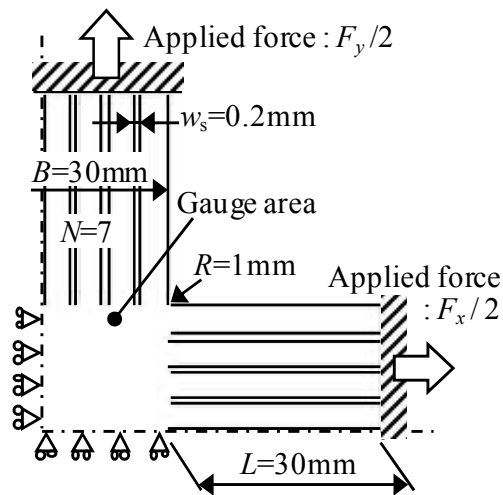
Analysis model and dimensions of cruciform specimen.
